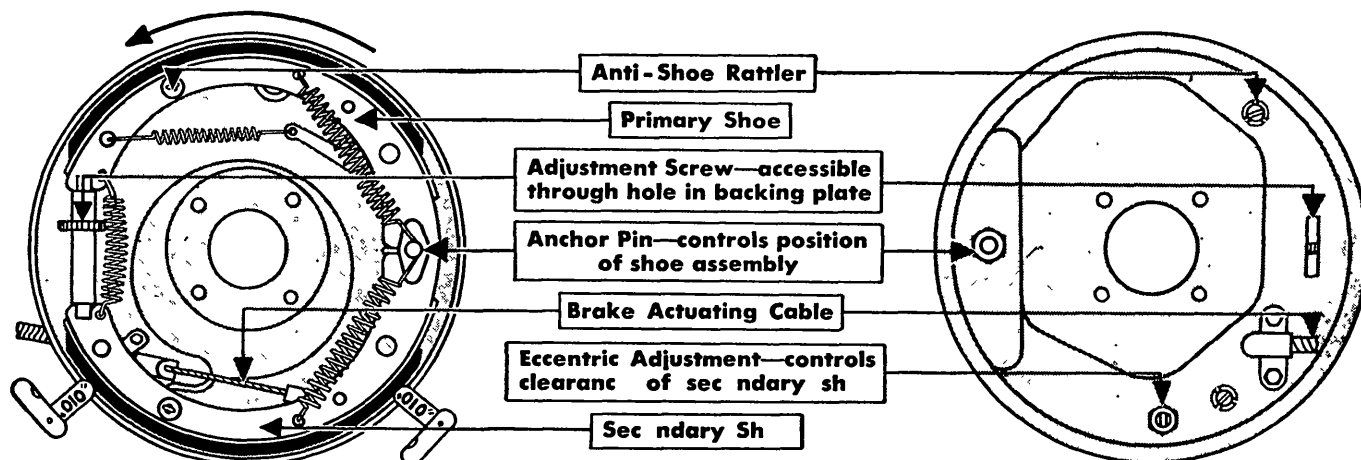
Bendix mechanical single anchor brake with eccentric adjustment for secondary shoe. Diagram shows left rear brake; front brake identical except for absence of parking brake
